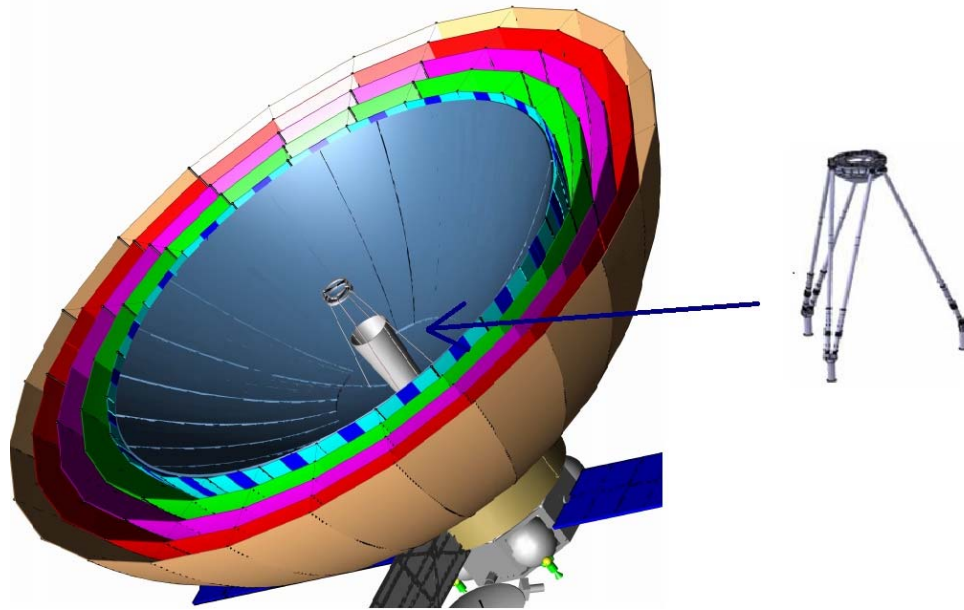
Layout chart of the supporting tubular structure in the construction of space observatory
